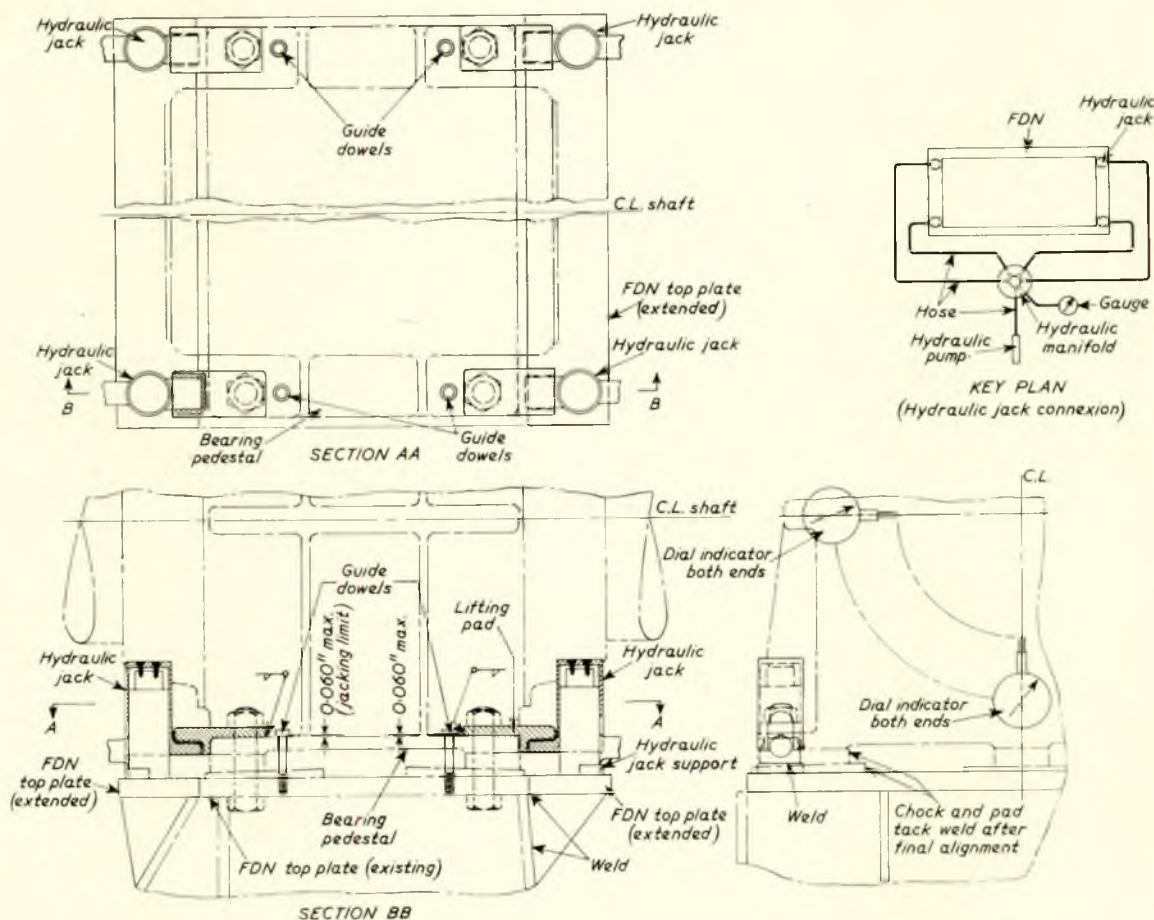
Portable load test jacks for steady bearing (hydraulic)
